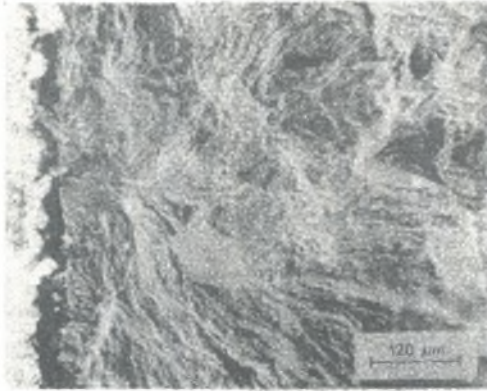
View of fatigue fracture on airfoil surface taken by means of a scanning microscope. Airfoil abrasive-blast treated and glass bead peened
